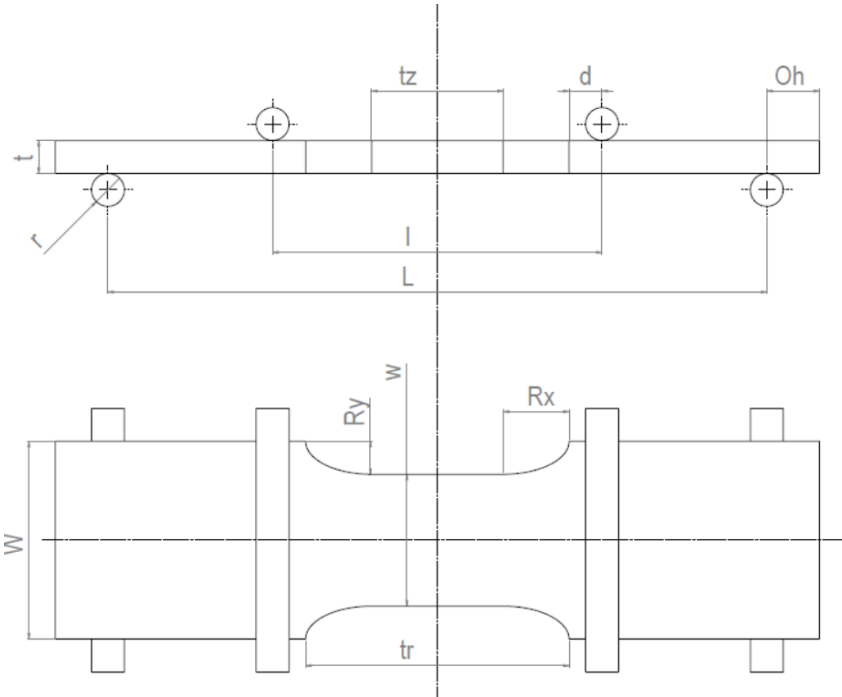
Specimen’s technical drawing with supporting and loading rollers.
